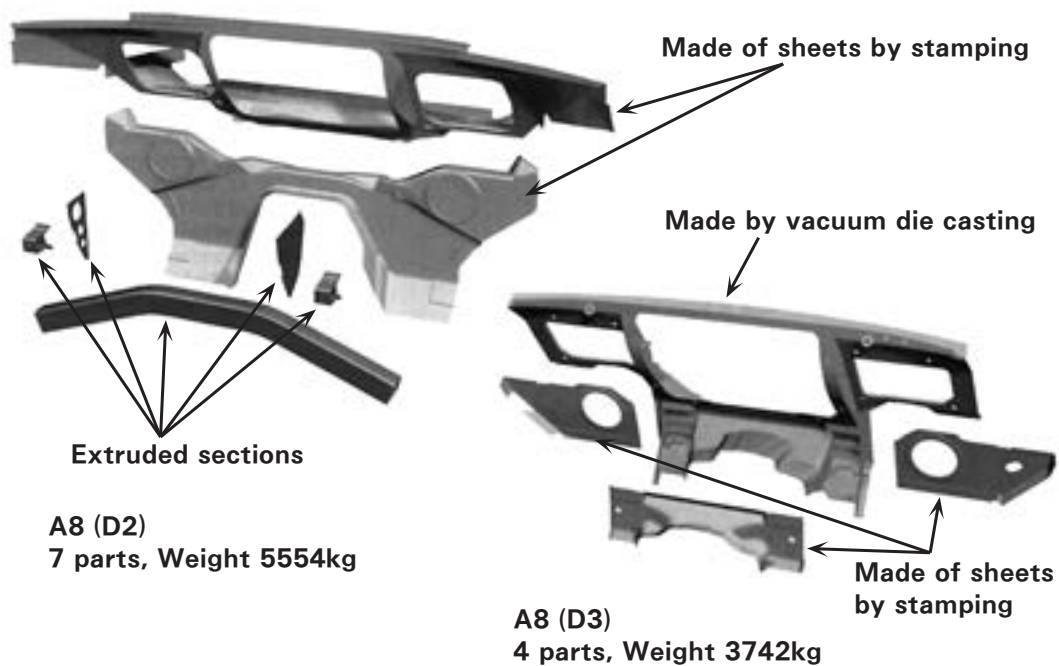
Example of Audi A8 (D3) large casting parts (Cast radiator tank)¹⁹⁾.
